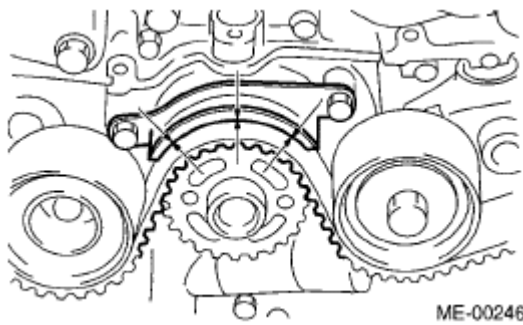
Identifying Clearance Between Timing Belt And Guide
